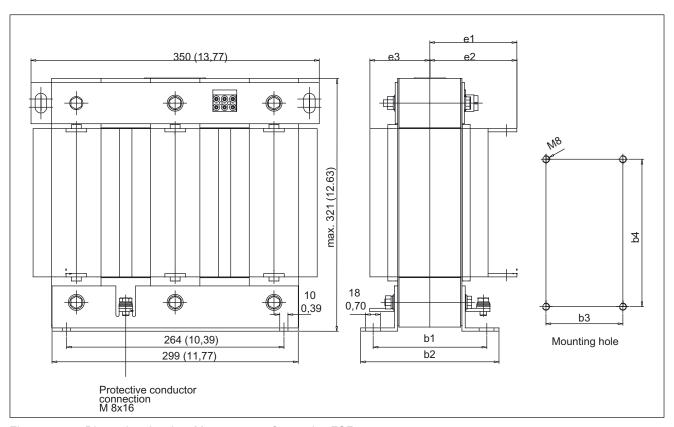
Dimension drawing: Motor reactor, frame size FSF
